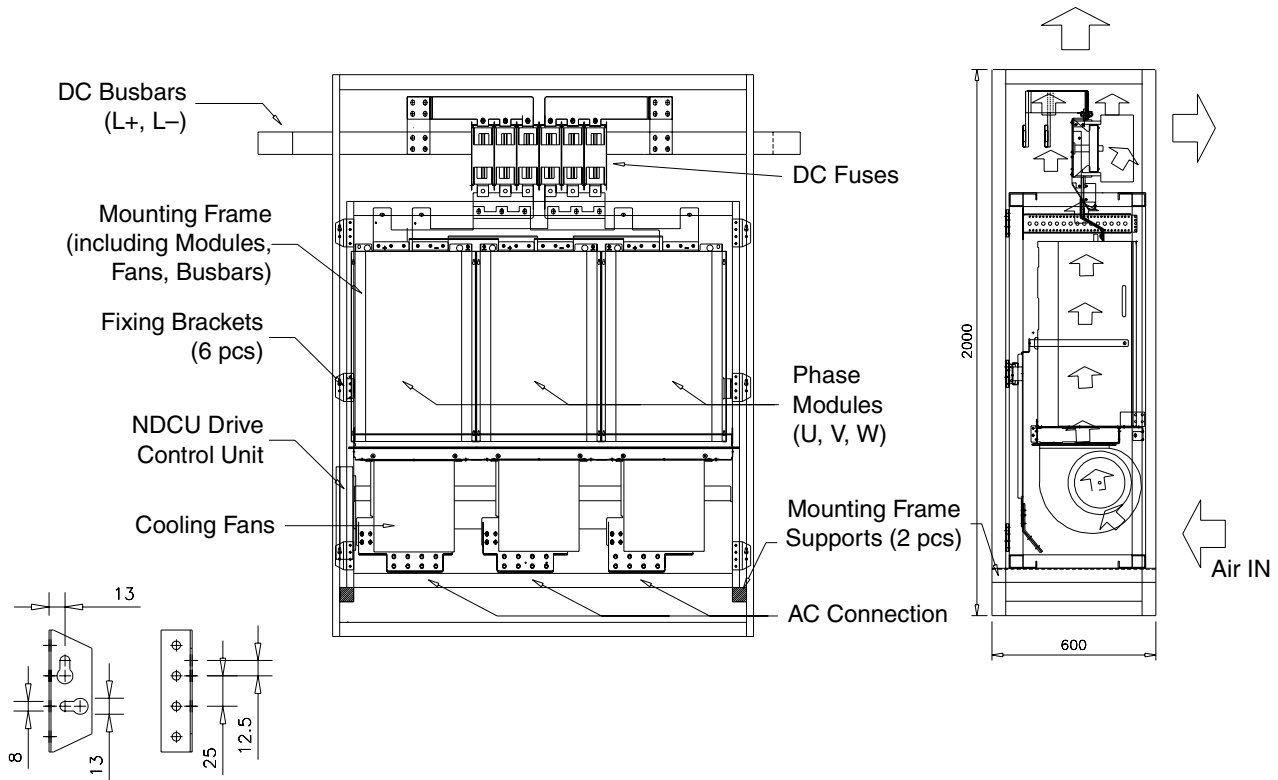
Cabinet layout example for R12i modules – Installation using the mounting frame.
